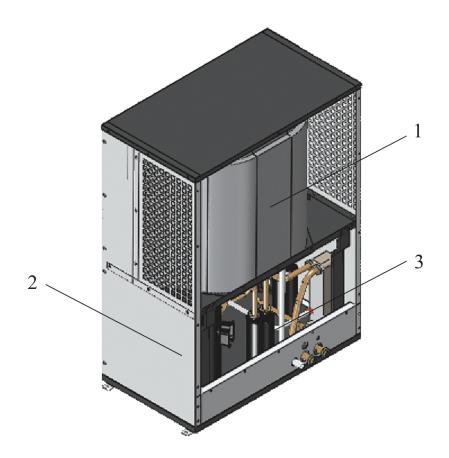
Heat pump 1 – Evaporator; 2 - Casing; 3 – Compressor chamber
